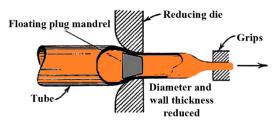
The schematic visual of the tube drawing process with floating mandrel [5]
